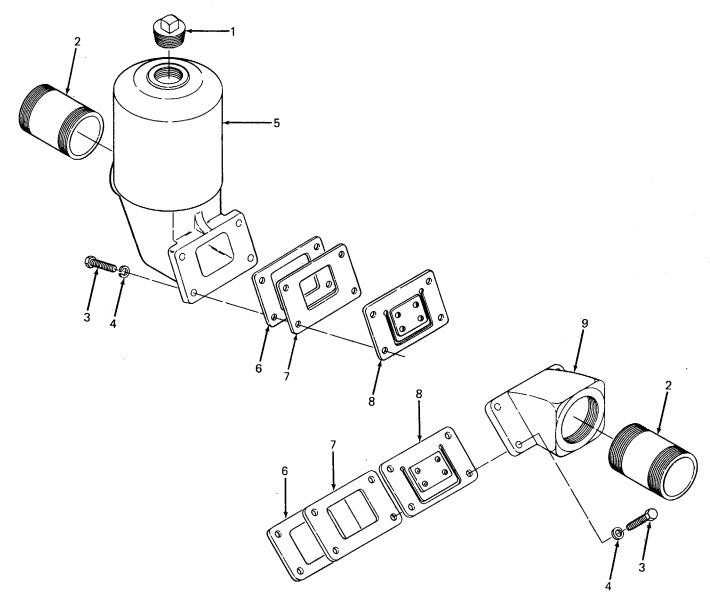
Accumulator, Check Valve Assemblies, and Discharge Port.
